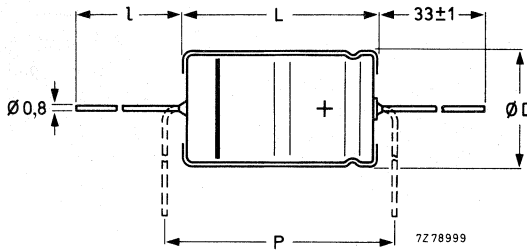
Style 1; see Table 1a for dimensions D, L, l and P.
